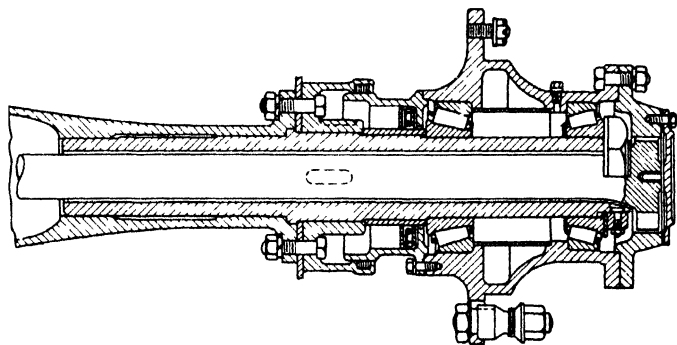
BRITISH TRUCK AXLE WITH COMPOSITE HOUSING.
